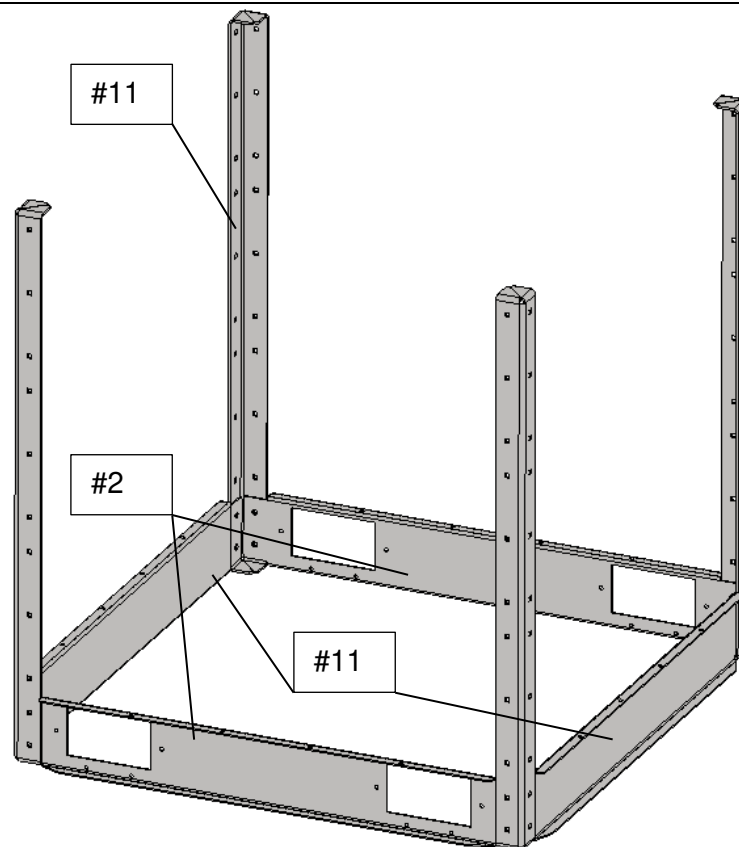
Exploded view of air box 0.7m³ with angled outlet (not all parts numbered)
